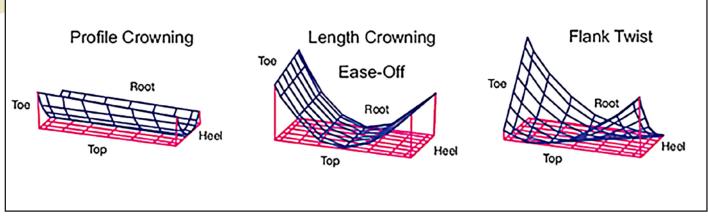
Flank surface modification elements (crowning) used for bevel gears.
